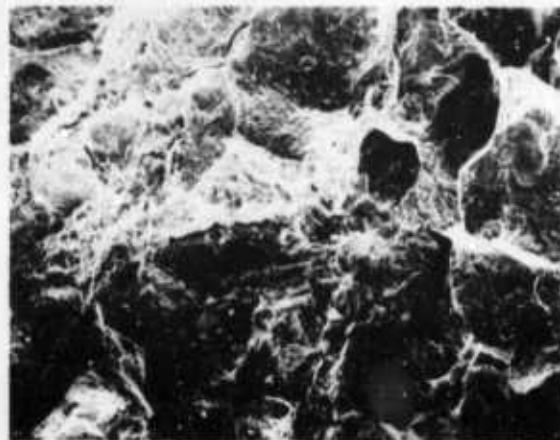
SEM micrographs, fracture surface, specimen 6513, I-718 weld + STDA tested at 4.2°K
